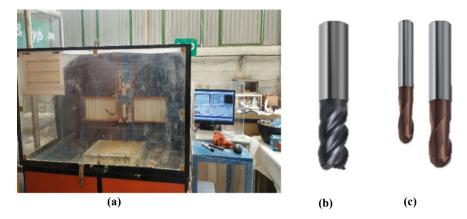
Machine and tooling research: a CNC machine; b End Mill; c Ballnose
